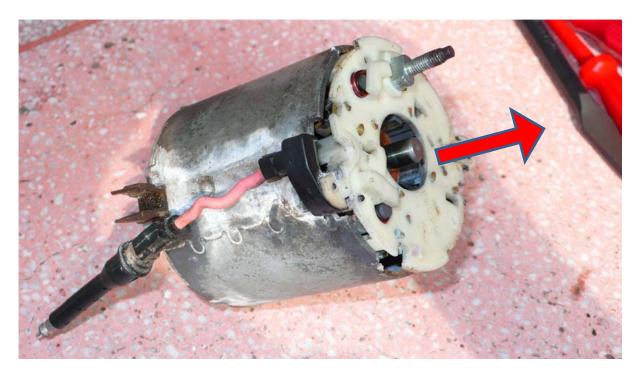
With a soldering Iron, disconnect the grey wire from the stud connector *on the aluminium block* (marked with arrow).
